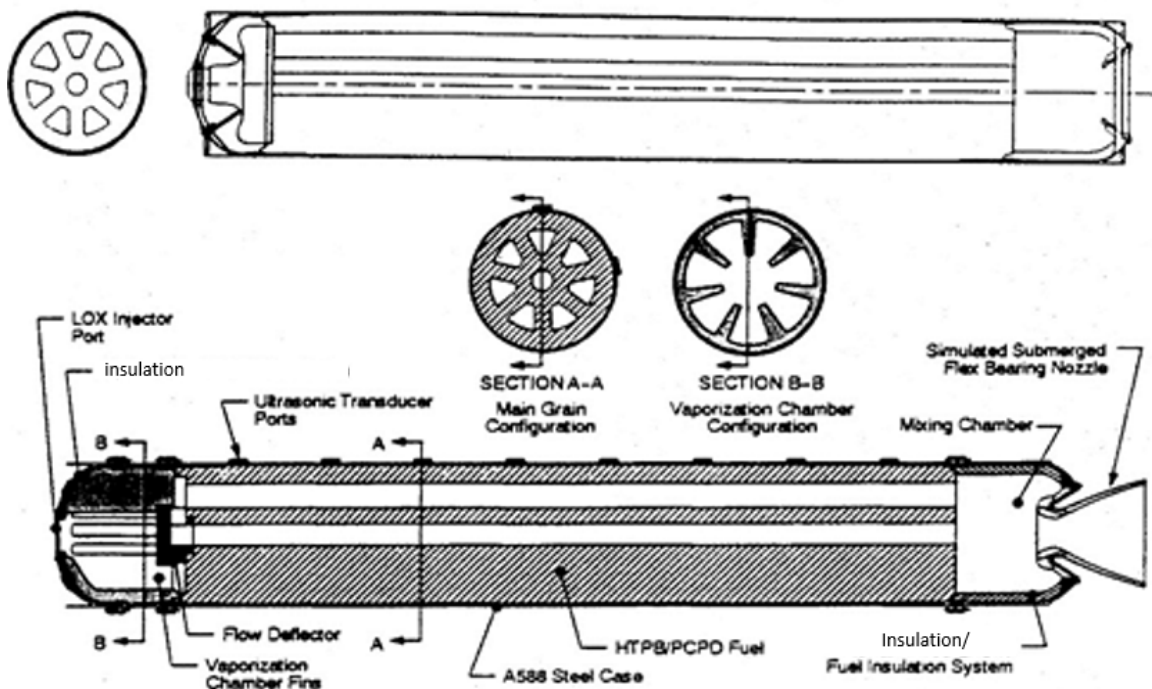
250K-lbf HPDP Hybrid Motor Layout⁷
